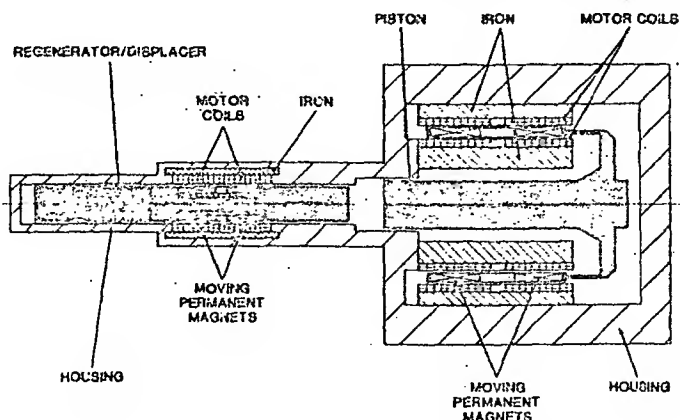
Cross-sectional view of rectilinear drive showing displacer and piston motors.
